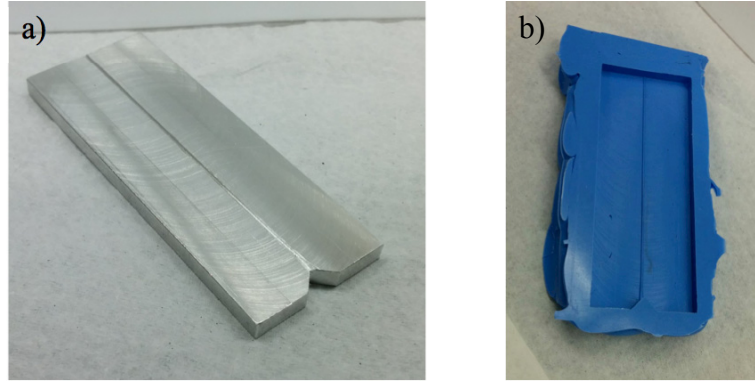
Double torsion fracture toughness (a) sample cast and (b) mold.
